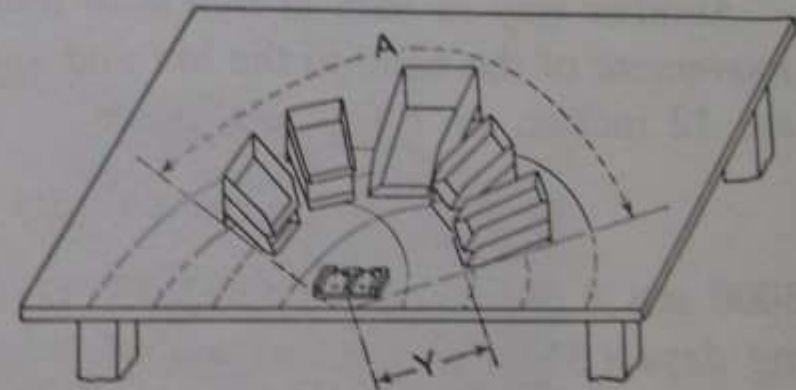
Correct work-place layout. Bins are located close to the fixture. In many kinds of work the eyes must direct the hands. In such cases the work area should be located directly in front of the operator so that eye fixations will be as few and as close together as possible. Angle A should be as small as possible, and distance Y should be as short as the nature of the work will permit.
